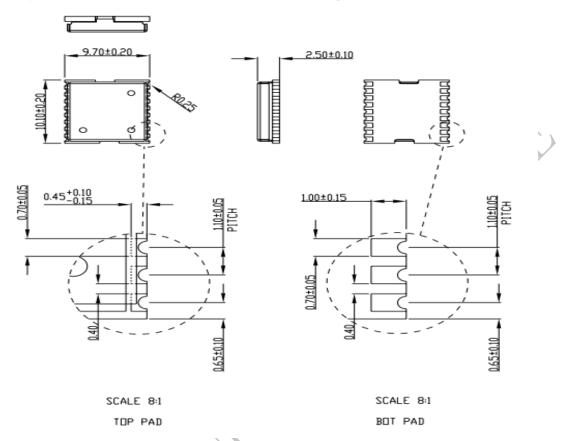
SIM68M mechanical dimensions (Unit: mm)
